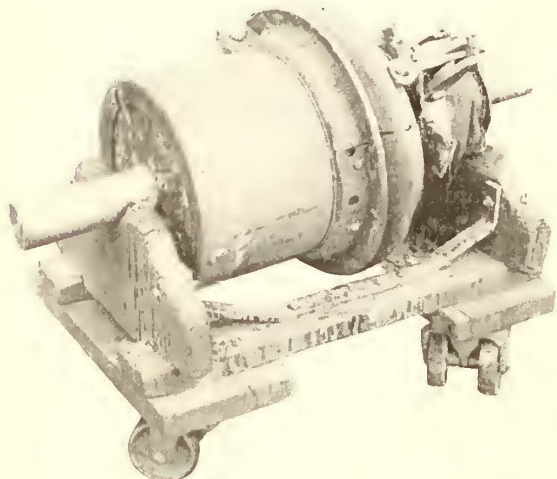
San Francisco Welding—Ready for Heating
